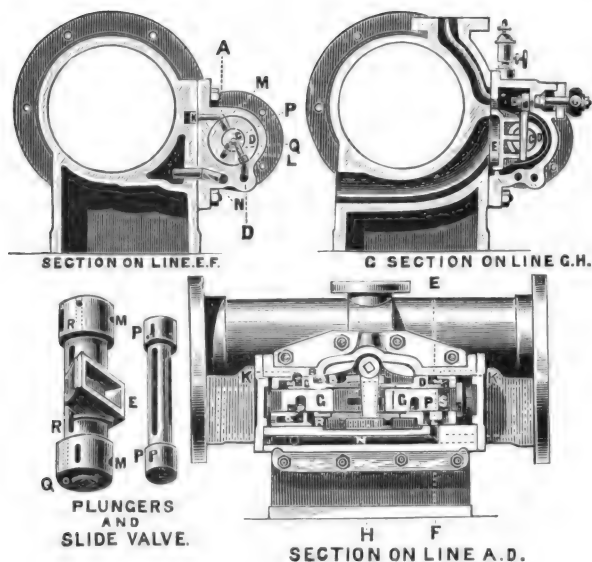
Details of “Cornish” Valve Gearing in the Evans Pump.
